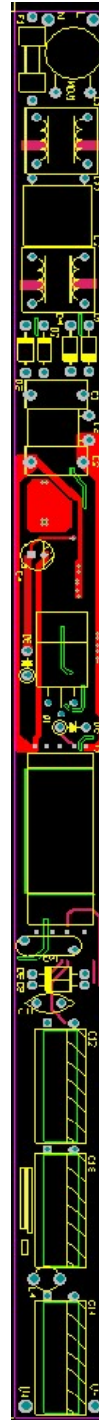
PCB Pattern Top / Bottom of Evaluation Board
